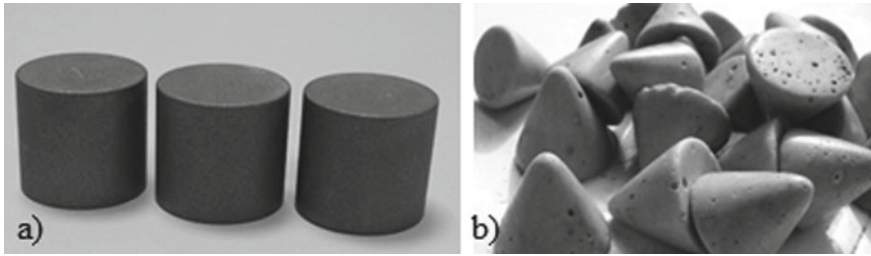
a Workpiece and b abrasive particles in experiments
